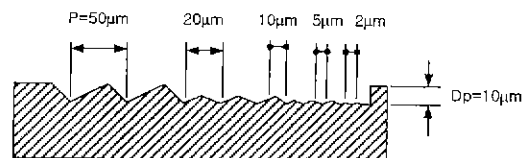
Skeleton shape of the workpiece and detailed shape of cutting tool edge.
